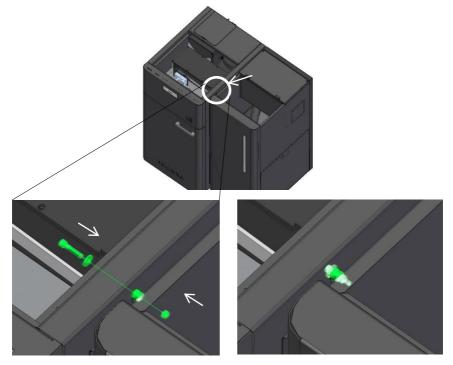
Attaching and securing the storage unit to the boiler – Side view
